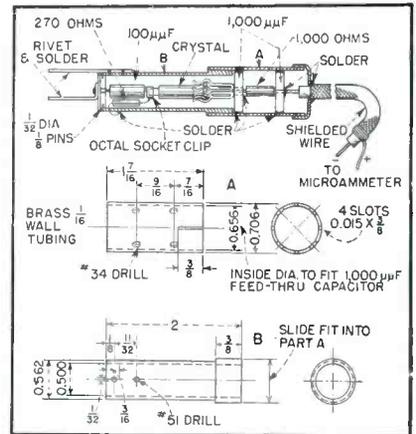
Crystal probe assembly consists of two cylinders machined so the end of one slides inside the other for rapid replacement of crystal cartridge
